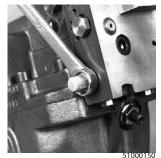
Remove PCOR Defeat Spool Plug or Fitting
